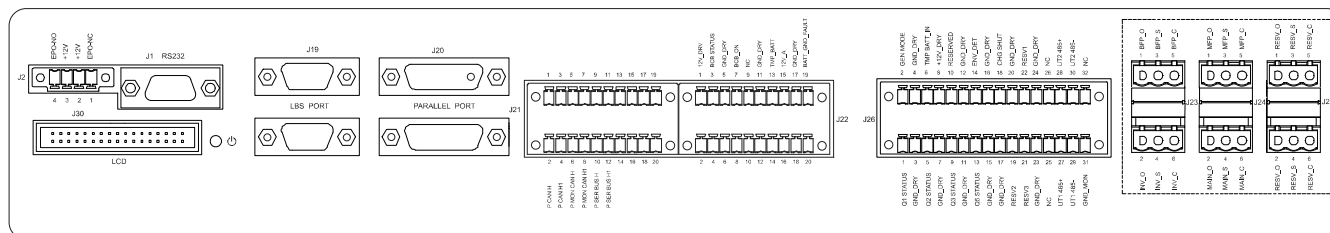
Auxiliary terminal block detail (static switch assembly front panel)
